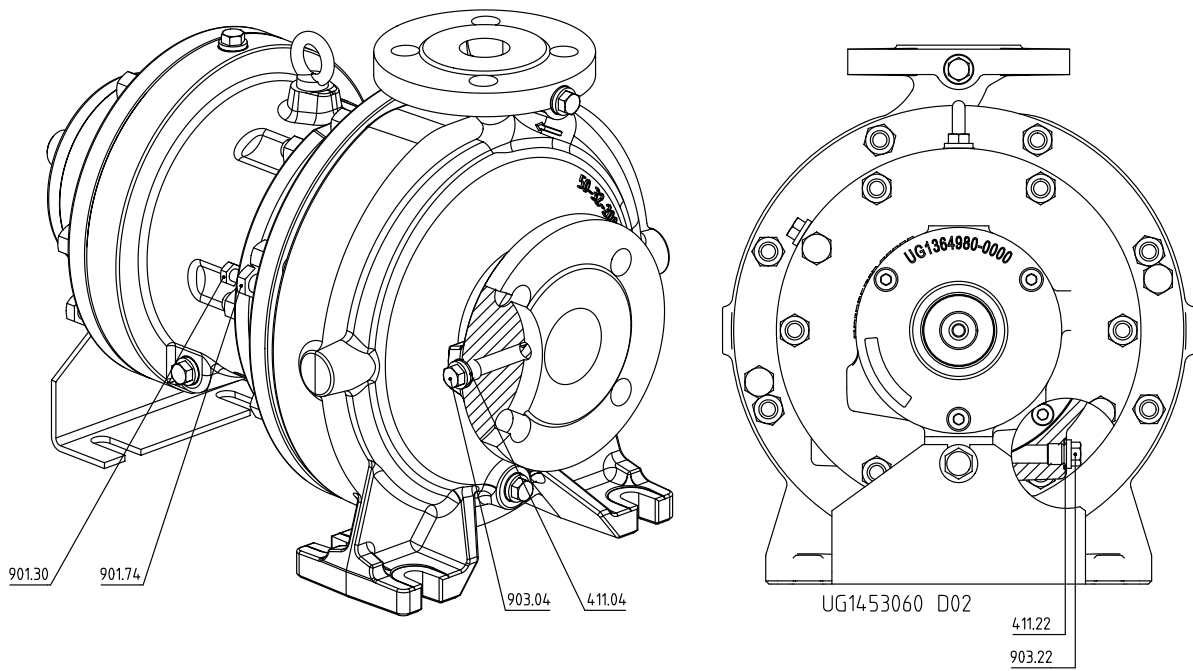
Mounting of discharge cover on the pump casing of version with bolted cover
